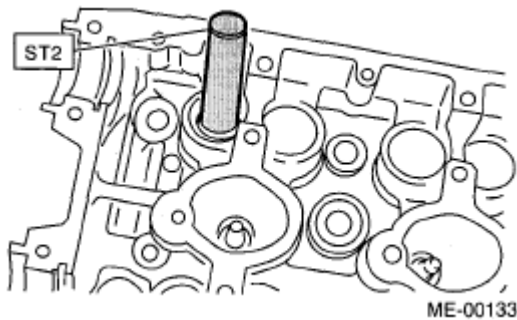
Identifying Valve Oil Seal Guide ST2 498857100
